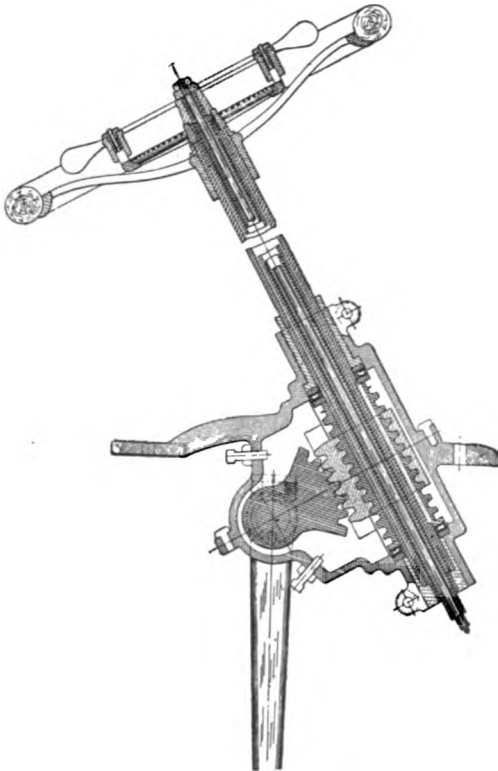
Steering Wheel Showing Throttle and Spark Levers.
